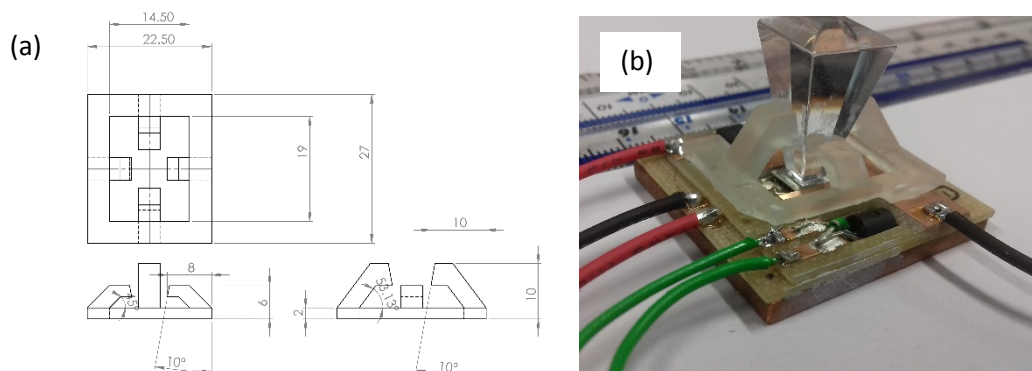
Figure Appendix A-1. The Optical Cradle CAD Designs (a) and Demonstrated on a GEN VI Receiver (b)
